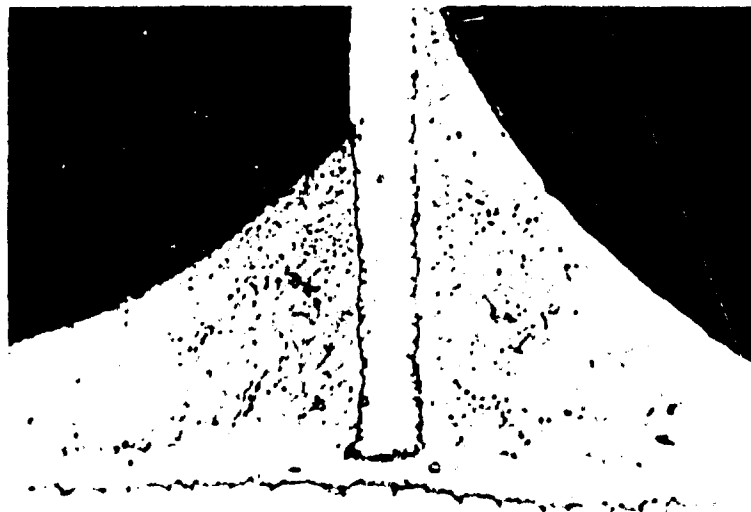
TYPICAL PREMABRAZE 128 HONEYCOMB TO SKIN BRAZE JOINT
